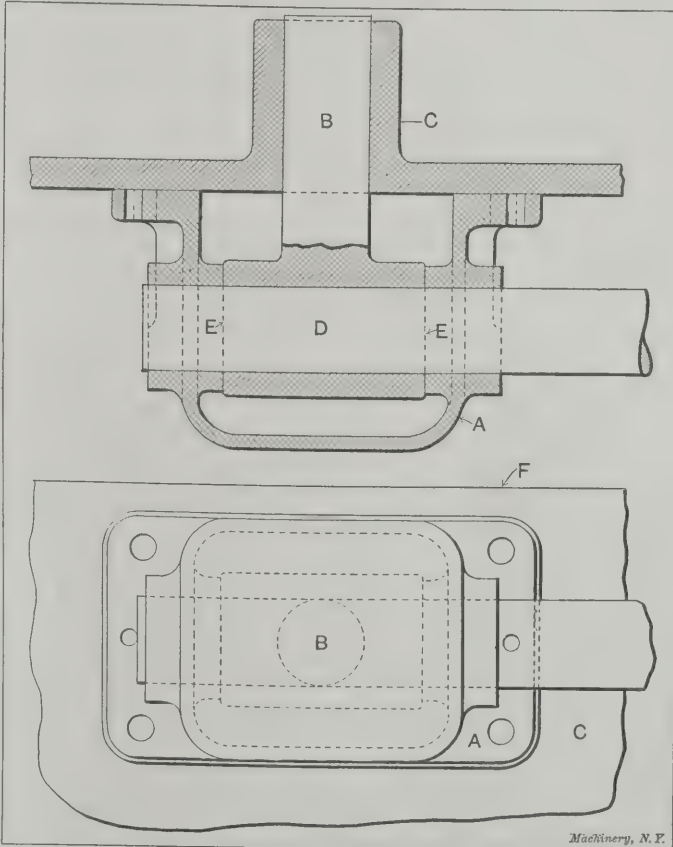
T-jig for Locating a Bevel Gear Bracket
